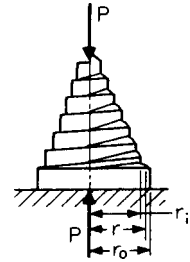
Conical helical spring: rectangular cross section.
